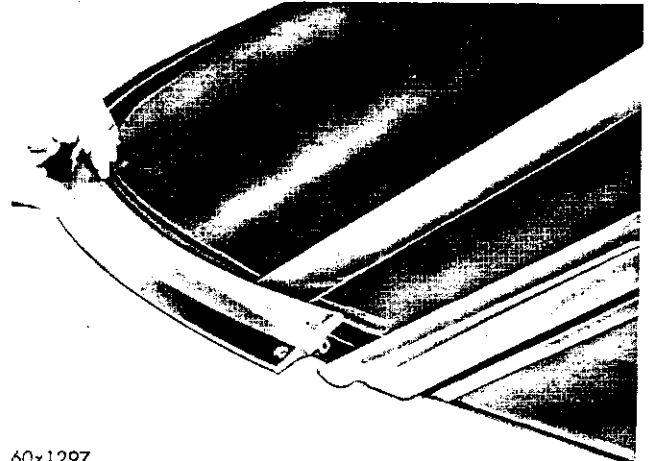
Removing the Lower Rear Window Side Mouldings (Imperial)
